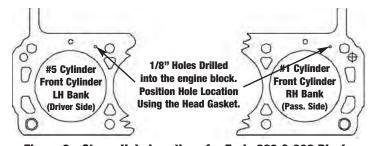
Steam Hole Locations for Early 289 & 302 Blocks
